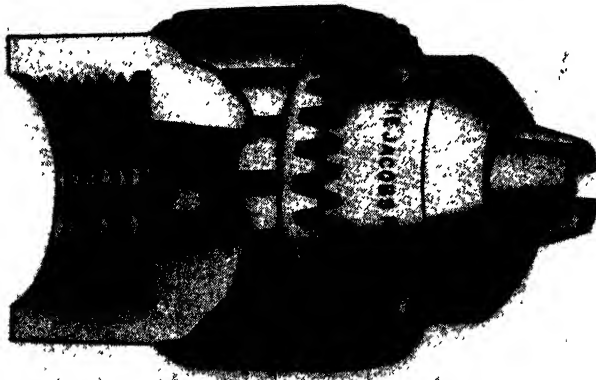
A hollow headstock spindle chuck for holding small-diameter work. (South Bend Lathe Works)
